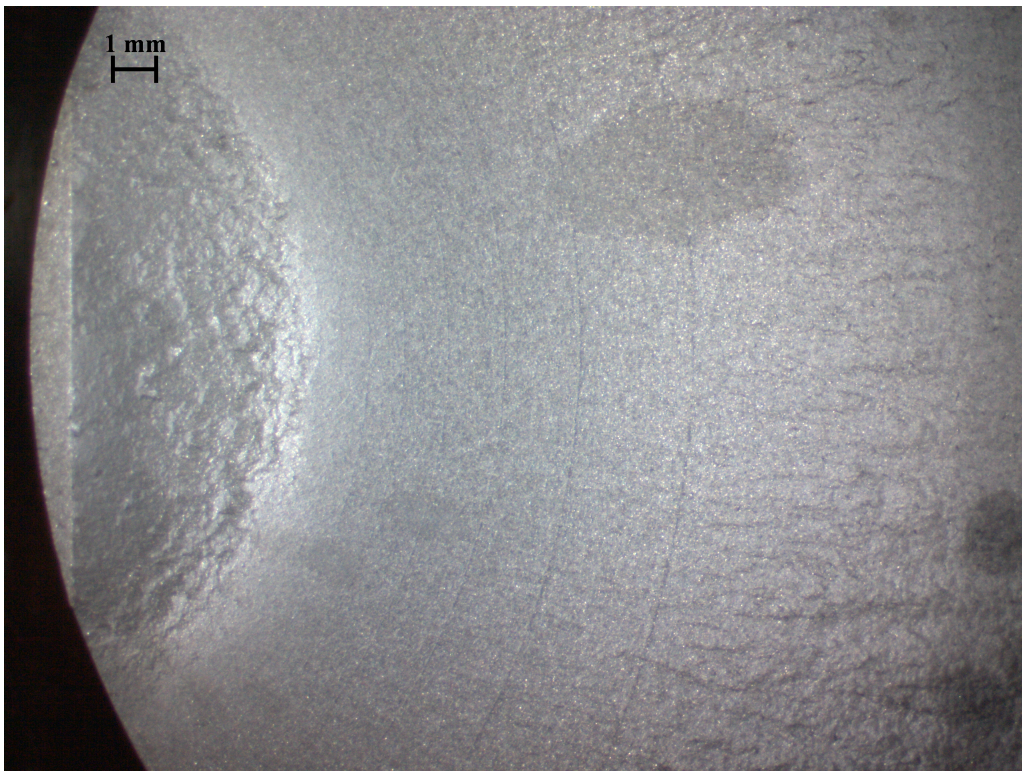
Picture of the fracture surface of specimen 1Z.
